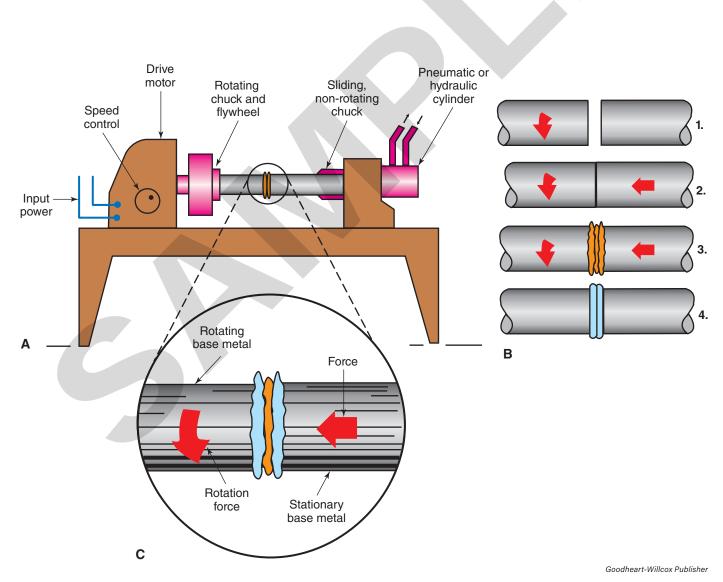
Friction welding (FRW). A—Schematic of a friction welding station. B—Four steps in producing a friction weld. C—Closeup of a friction weld being made.
